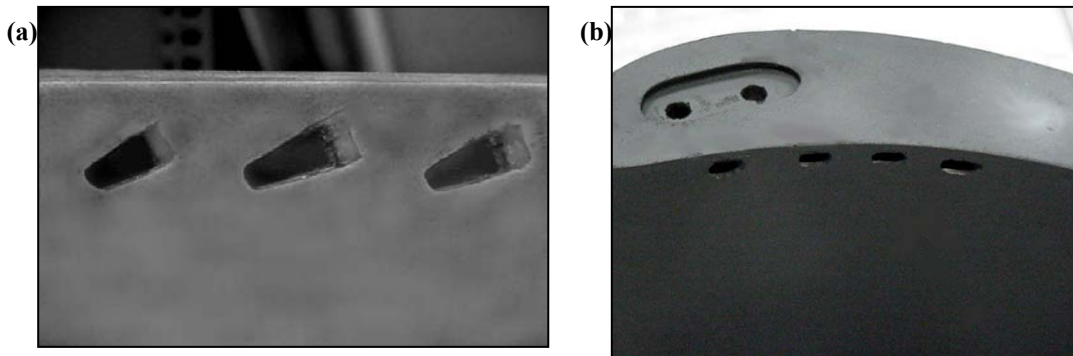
Images of SLA model for the EDM holes (a) and laser holes (b) placed within the foam blade
